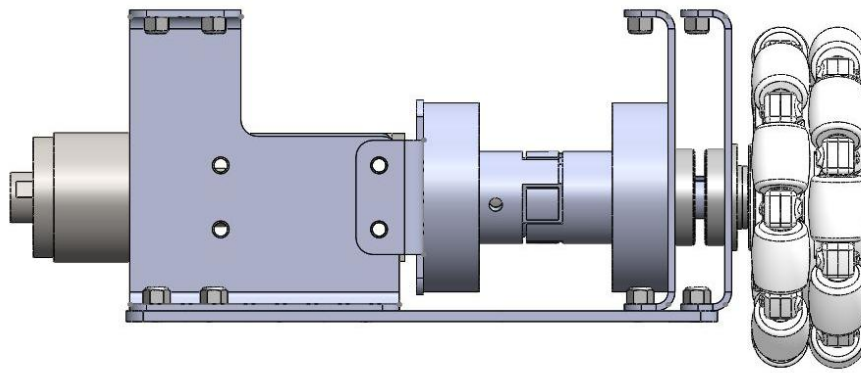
Modular Flexible Actuation and Torque Sensing Assembly
